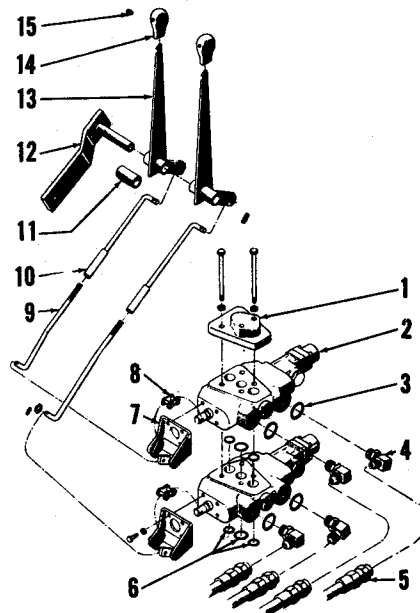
Remote control valves (2) are mounted between manifold (1) and pump adapter plate top surface. Lever position is adjusted by shortening or lengthening links (9 and 10) to align levers with detent positions of valve. Early valve without adjustable flow control is shown.
